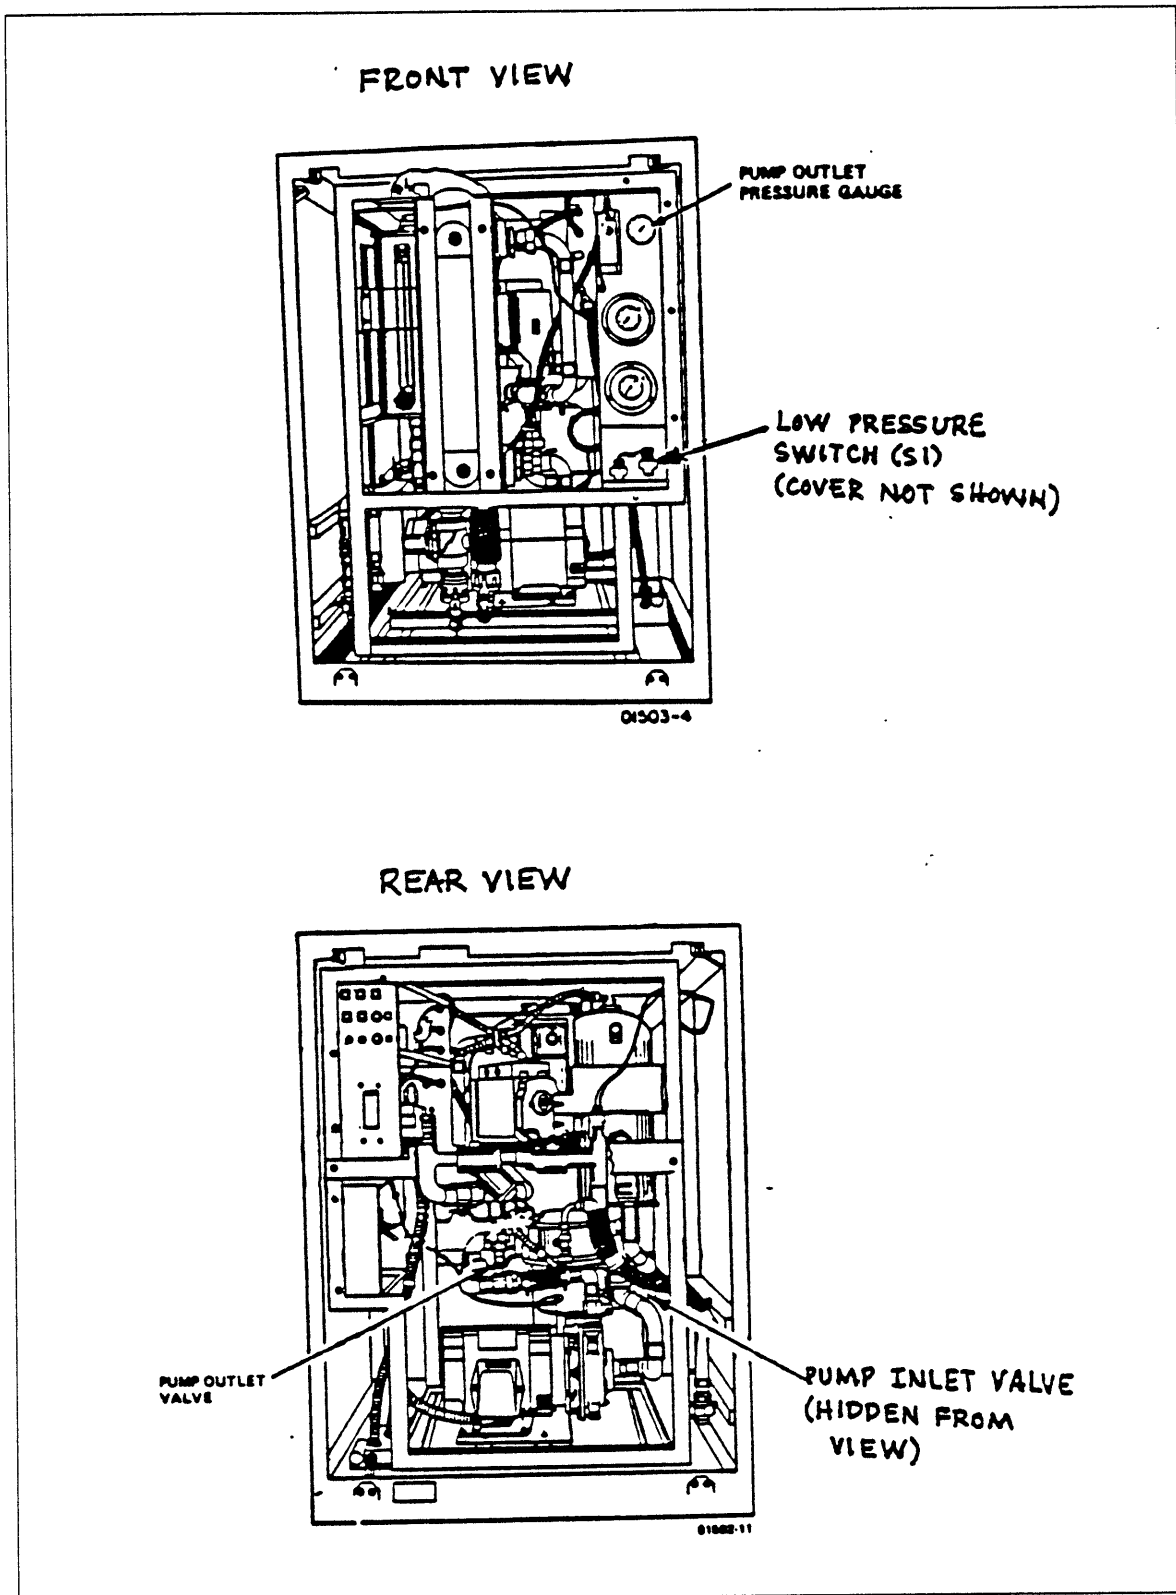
GH251-C Low Pressure Switch Adjustment
